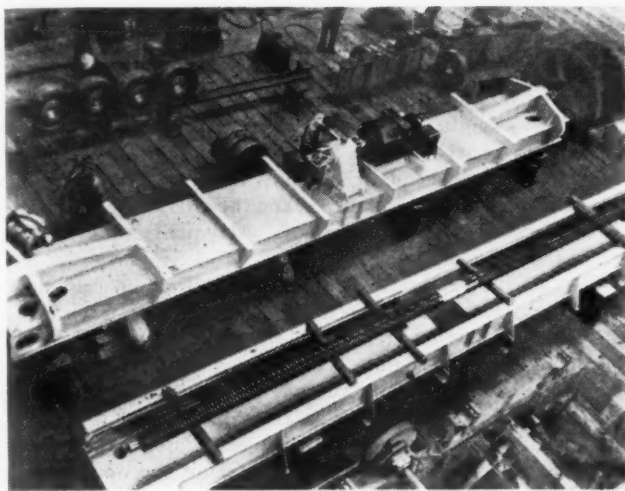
SHOP-ASSEMBLY VIEW OF T_pICAL SCREWS AND FRAMES
